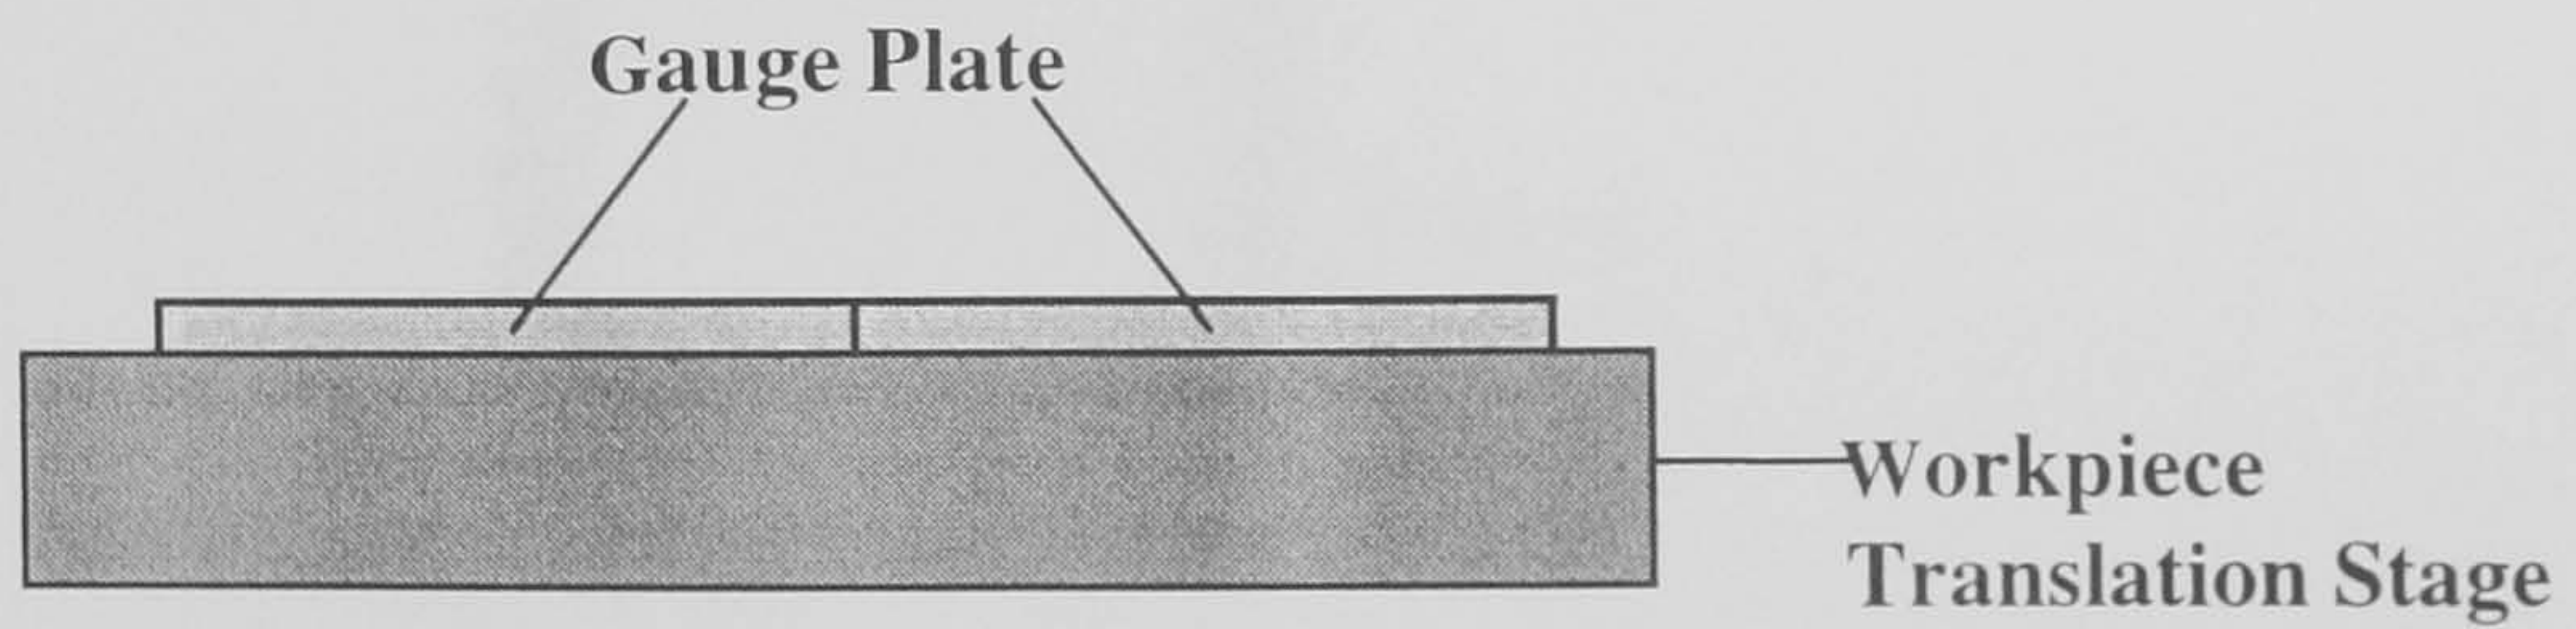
Unclamped Geometry For Laser Welding
